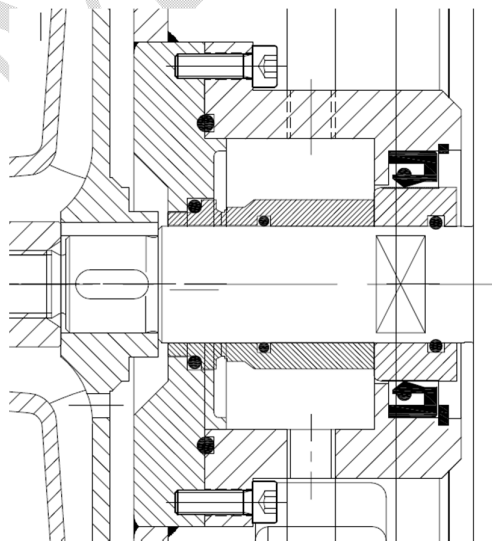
Detail view of U- Execution pump (External Mechanical seal)
